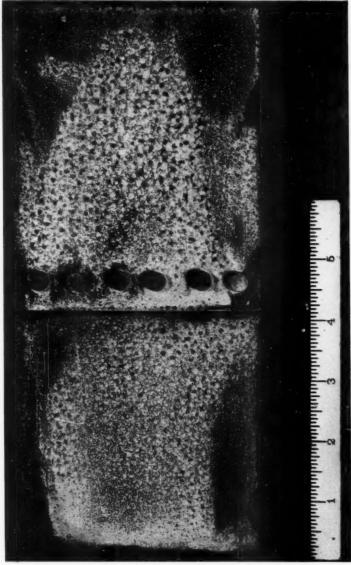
Bottom Surface of a Riveted AZ31A Magnesium Specimen, 0.064 in. Thick, After Being Exposed to Rural Atmospheric Conditions for a Six-Month Period.
